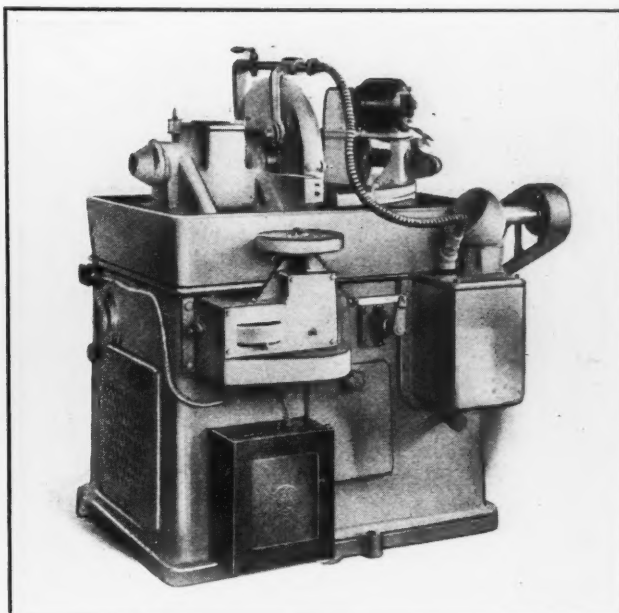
Rear View of the Motor-driven Valve Grinding Machine
